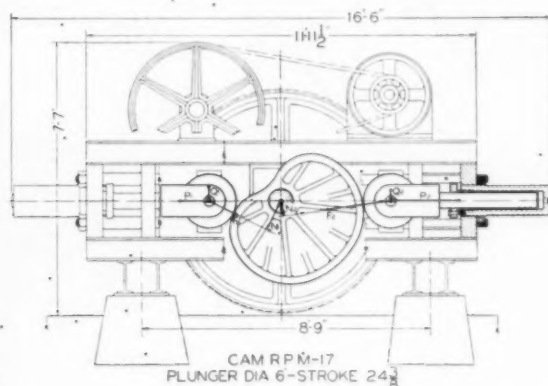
DIAGRAM SHOWING CAM AND ROLLER MECHANISM OF PULSATOR
